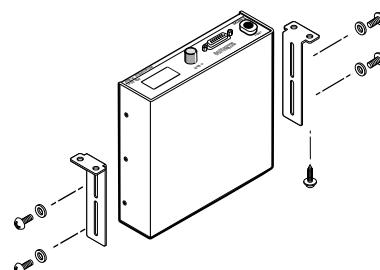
Attaching the through desk brackets (part number 70-077-02)
